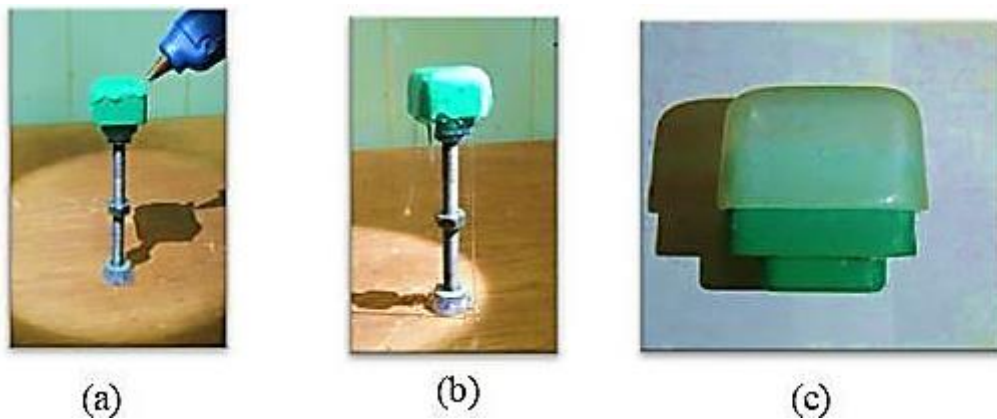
Mold making procedure: (a) Pouring melon wax over the punch. (b) Solidified wax. (c) Trimmed and finished mold.
